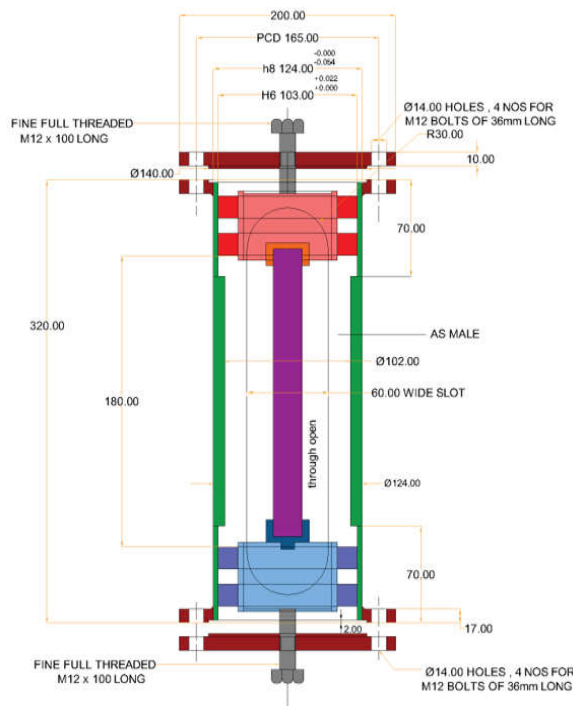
Fixtures for piston welding assembly (as made drawing)
